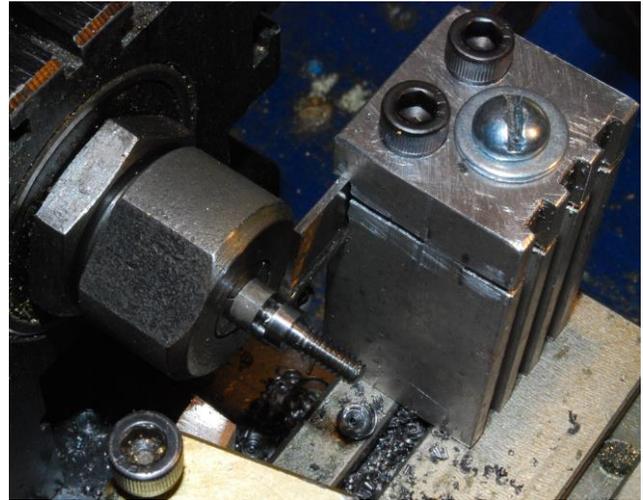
Two tool holders are mounted on the lathe at the same time allowing the entire screw to be made without remounting the tools. The parting tool is mounted upside down in the rear homemade tool holder. The ribbing on the tool holder serves no purpose; it was part of the scrap aluminum used to make the holder.
